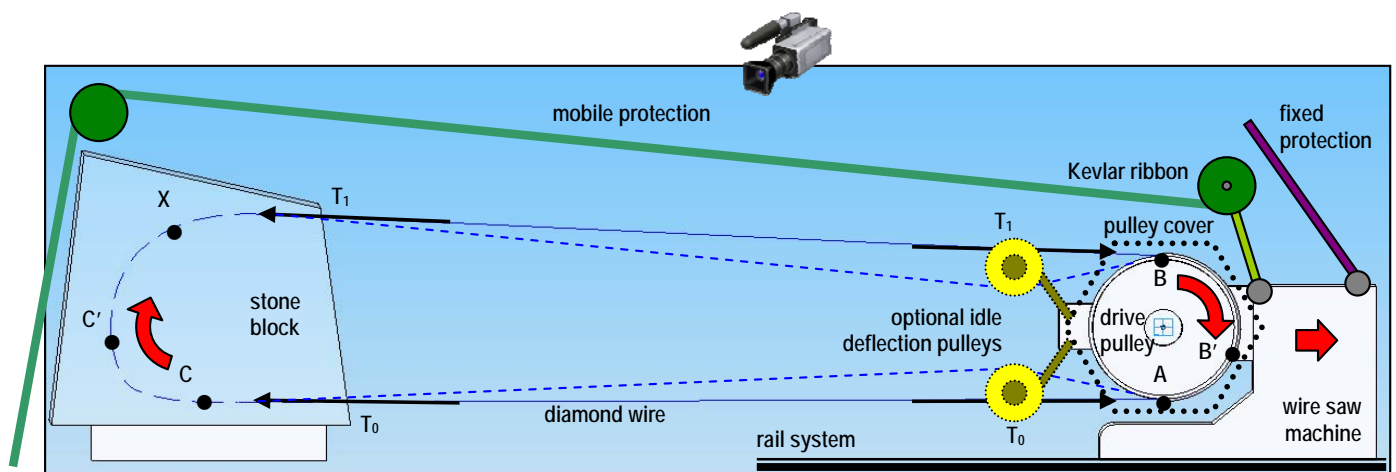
Configuration of the wire saw machine, forces in diamond wire cutting and protection equipment: drive pulley cover, fixed and mobile protections.
